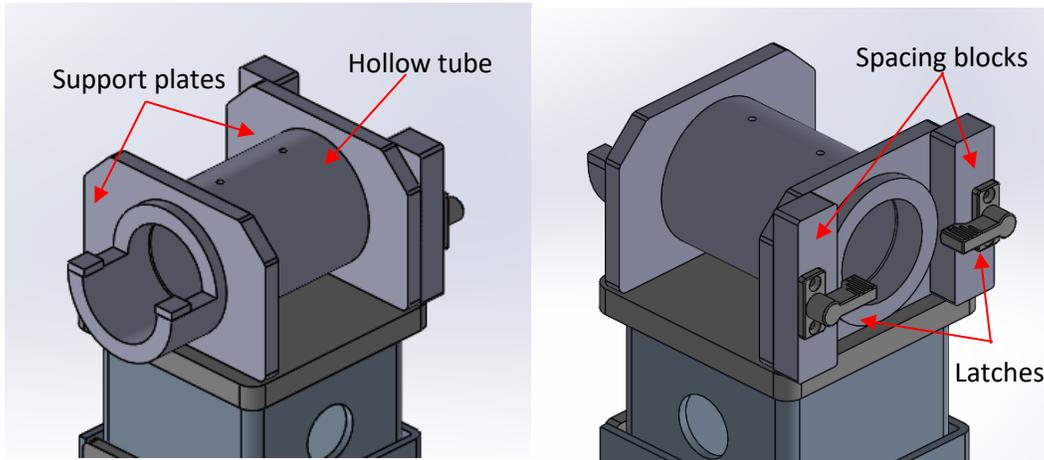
Shaft Housing in Final Idle End Design, Shaft Housing
